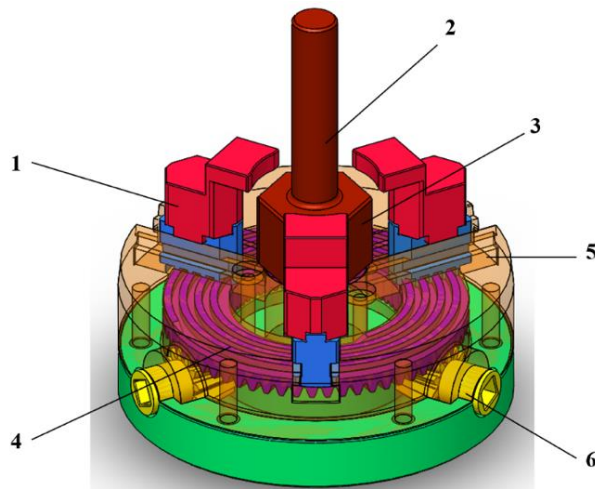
Mechanical concept based on jawed chuck. Jaws (1), passive interface (2), mating helve (3), scroll plate (4), linear guide (5), bevel gears (6).
